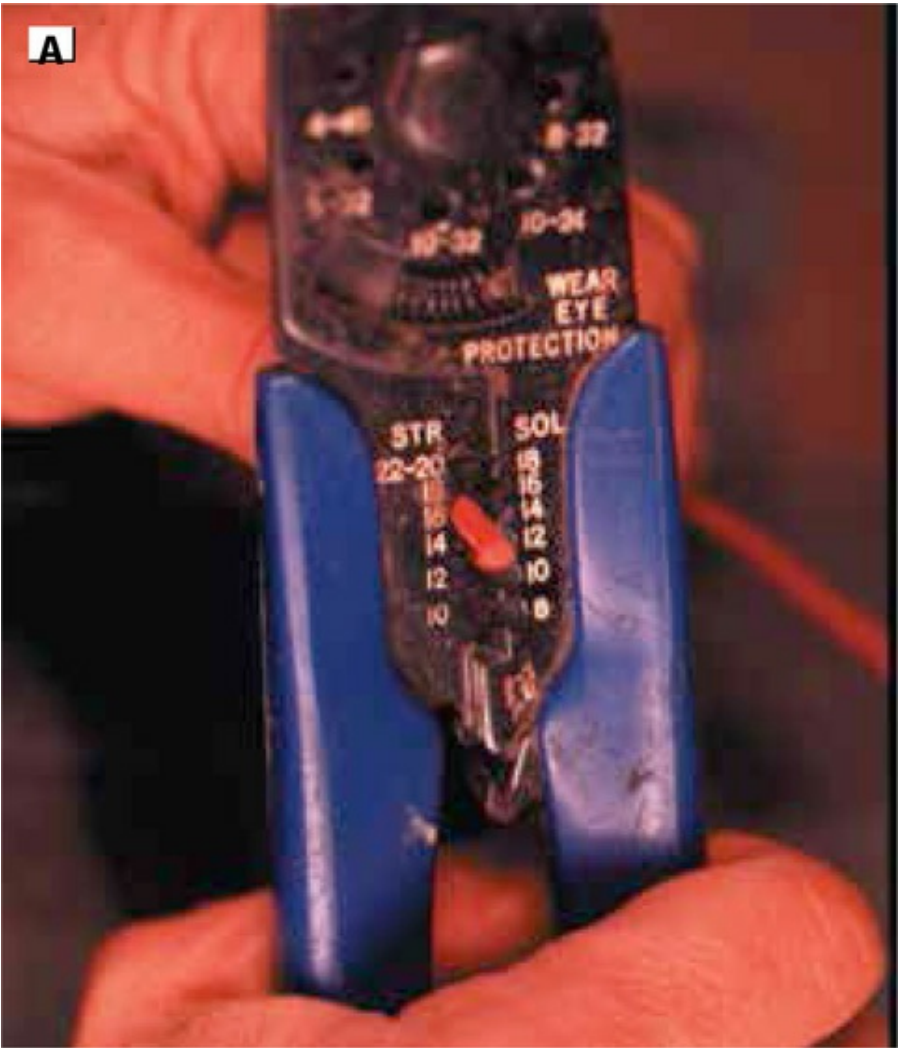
A. A cheap wire stripping and crimping tool. Note the stripping
